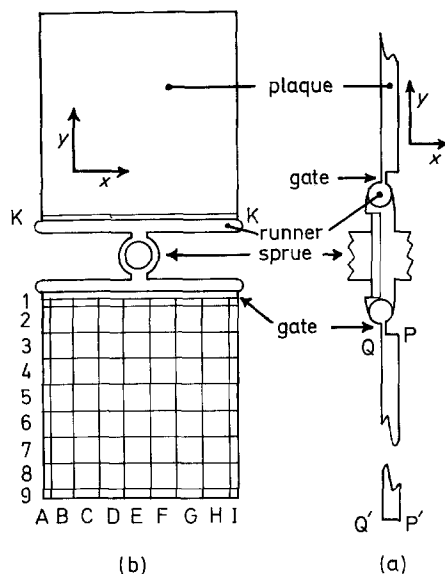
Side view (a) and plan view (b) of the pair of plaques obtained from the water cooled mould. During manufacture the position of the mould is such that the plane of the plaques is horizontal.
